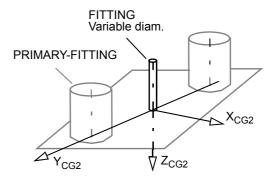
Compound gauge CG2, for the inspection of the positional tolerance of the boring of diameter 10.
